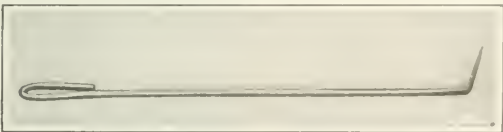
Puddling Rod used when welding Aluminum
